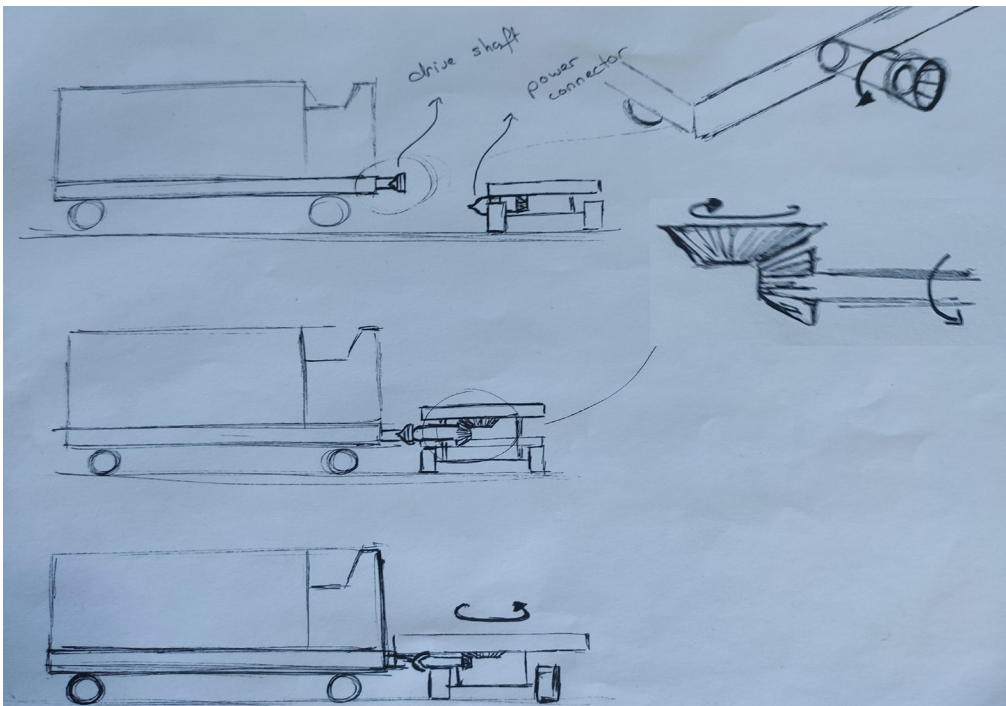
Detail of the gears from the transporter rod connecting to the gears of the dolly. On the left a side view of the transporter connecting to the dolly.
